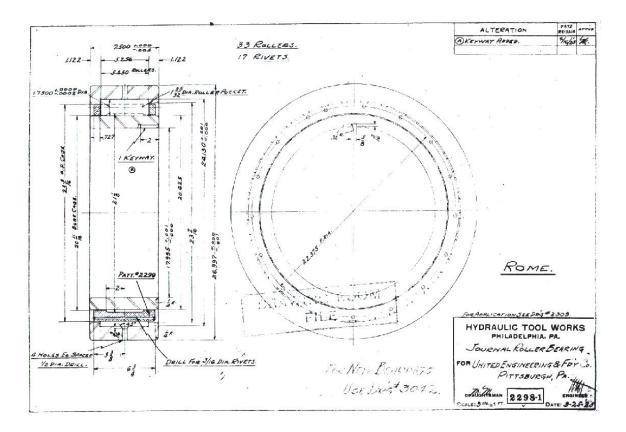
United Engineering and Foundry Company approached William Messinger of the Hydraulic Tool Company in Philadelphia for advice on roller bearings for the back-up rolls to the four high mill at Rome Brass. This is drawing 2298-1 of a Journal Roller Bearing, marked "ROME", one of a number of drawings of journal and thrust bearings for the Rome Brass project dated 3-25-25. The bearings are composed of an outer forged steel ring and a fixed bronze bearing race holding steel rollers in position. (courtesy of Messinger Bearings, Drummond Road, Philadelphia)
